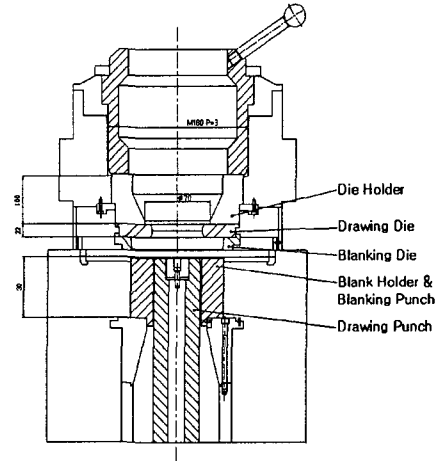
Sectional view of assembled die parts in universal sheet metal testing M/C
